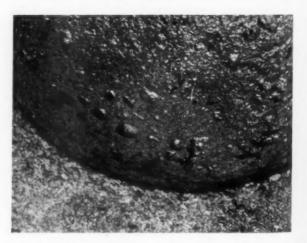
Blow defects on cored surfaces of castings when uncoated, dry sand core was used.
